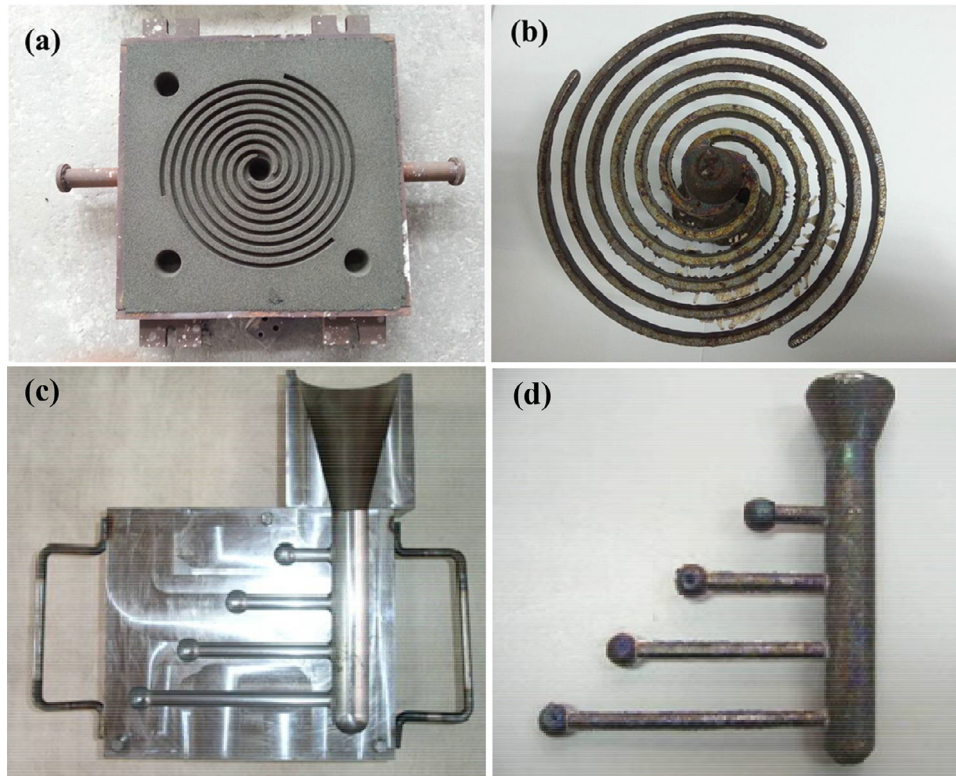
Photograph of (a) three spirals mold used to evaluate fluidity and (b) typical casting [40]; and (c) hot crack rod mold and (d) typical casting [43].
